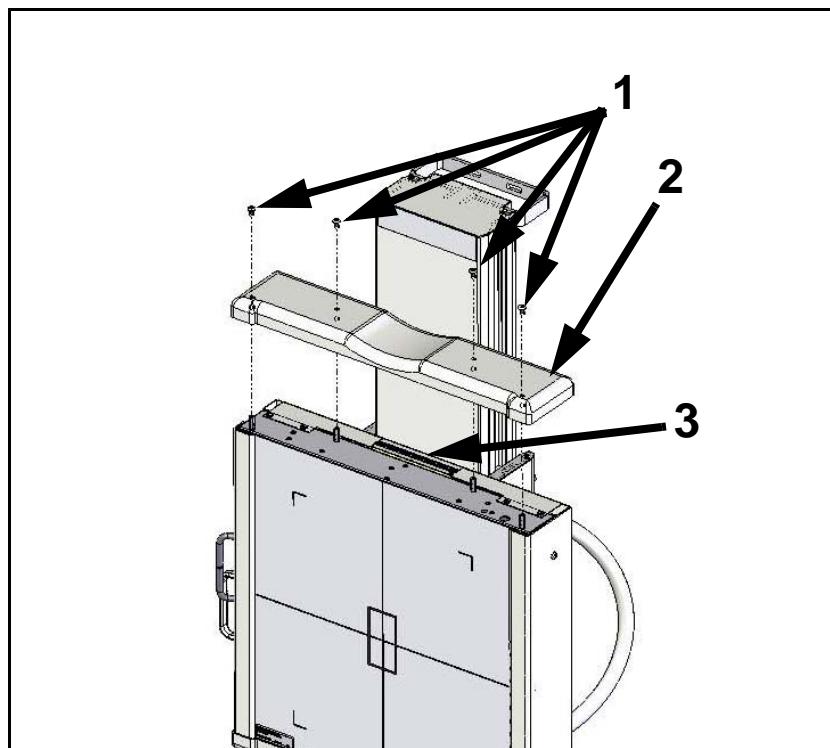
C-1. Vertical Carriage Assembly, Showing Weight cover.
